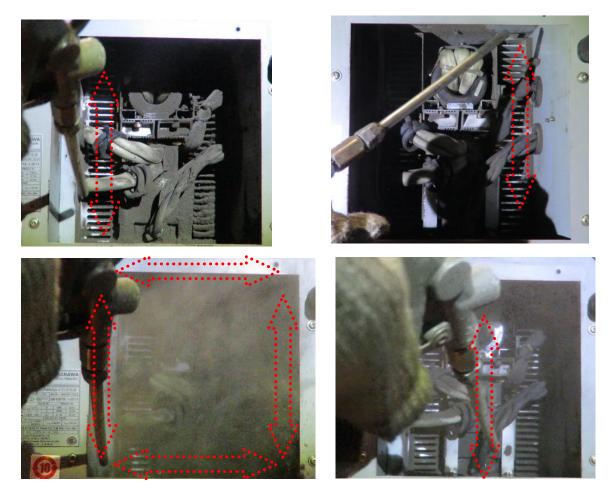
Blowing Dry Compressed Air on Rear Face
